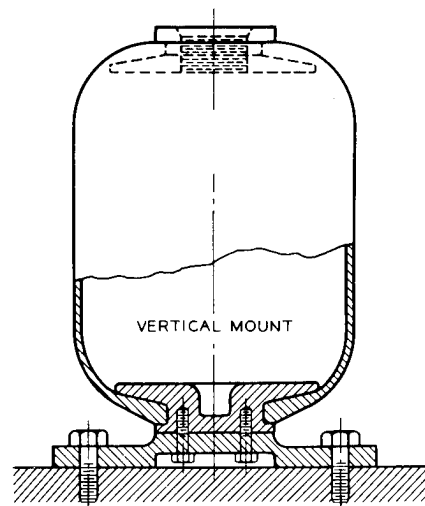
METAL ATTACHMENT IN VESSEL END
